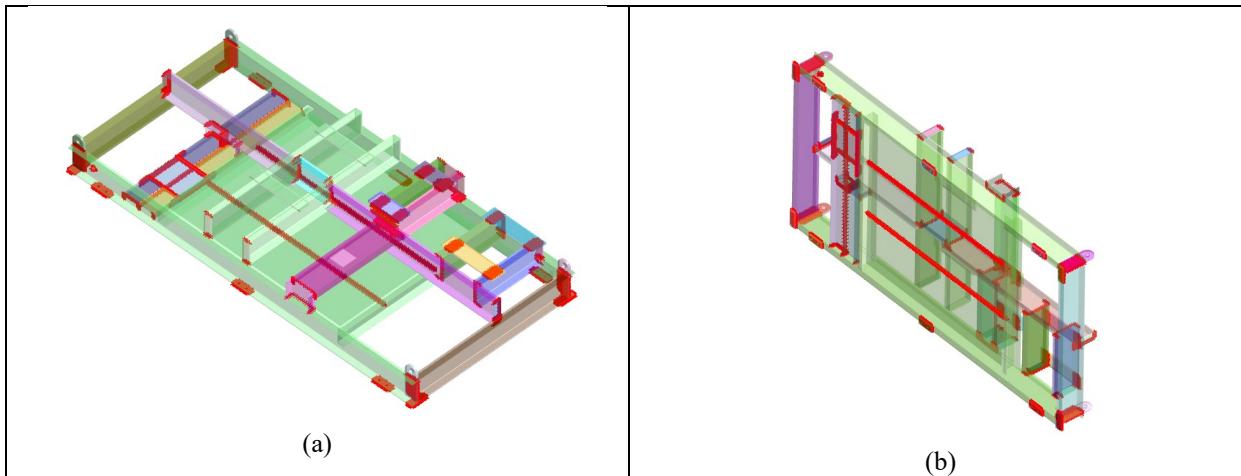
CAD pre-post-processing calculation for Skid Structure (a) front panel welded preparation, (b) side panel welded preparation.
